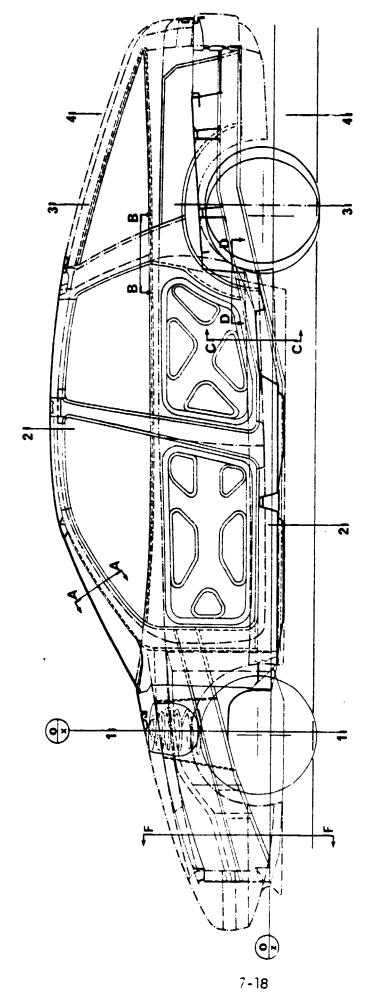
ROOF, SIDE AND REAR WHEELHOUSE CROSS SECTION
